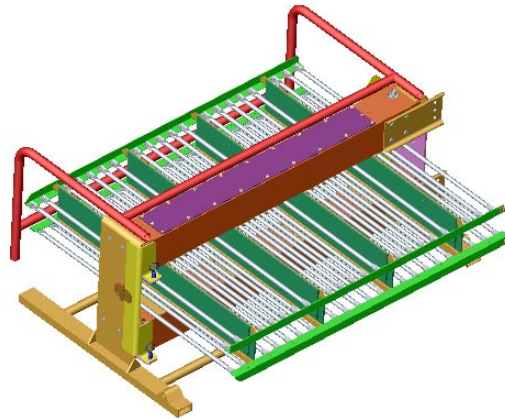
Flip the Hinged Locking Plate Up and Insert the Locking Pins
